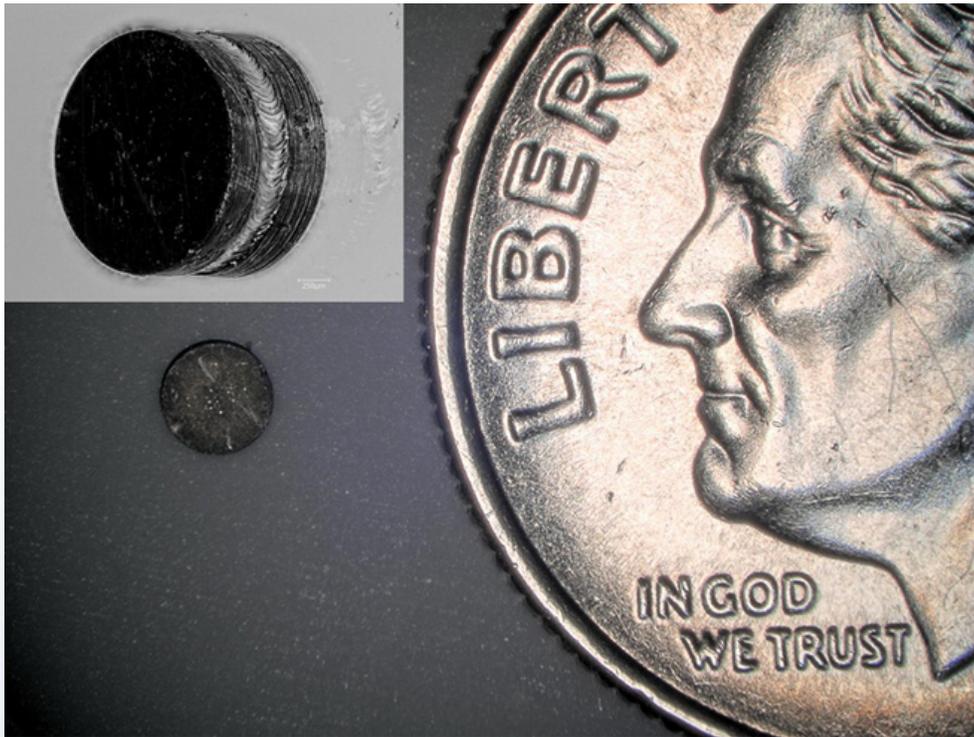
2-mm-diameter melt wire sensor chip alongside a dime. The inset shows clear view of laser welded chip.
